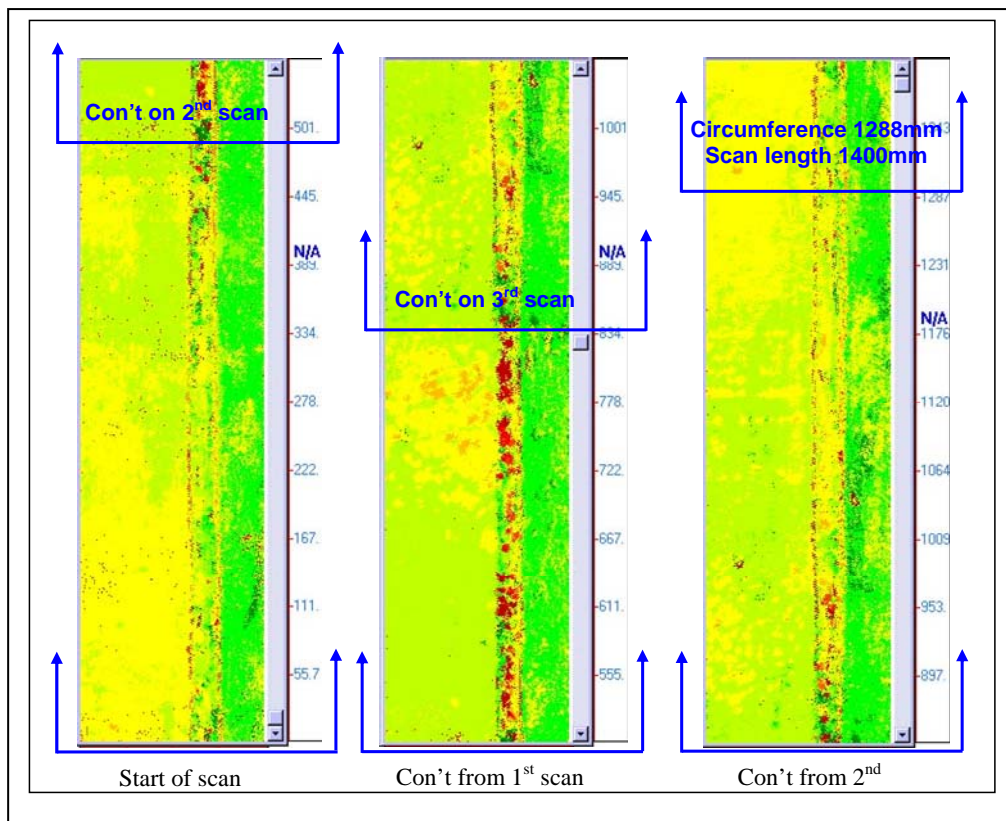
C-scan of weld split into 3 images. Arrows indicate start of scan and overlaps. Note that circumference of pipe 1288mm, however, scan length 1400mm used to ensure full coverage of pipe. The thin red lines along the edge of the weld are knife-line attack of the HAZ. Red colour represents 5mm remaining wall (corroded from 18-24mm original).
